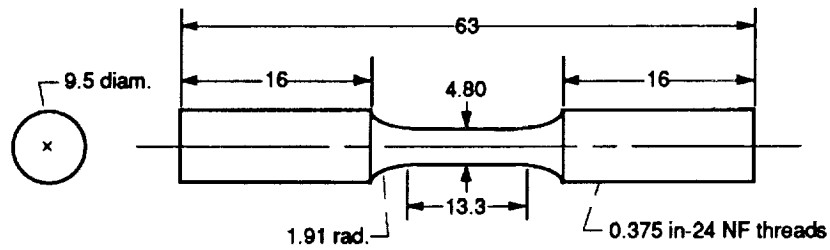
Ti-15-3 alloy test specimen. (All dimensions are in mm.)
